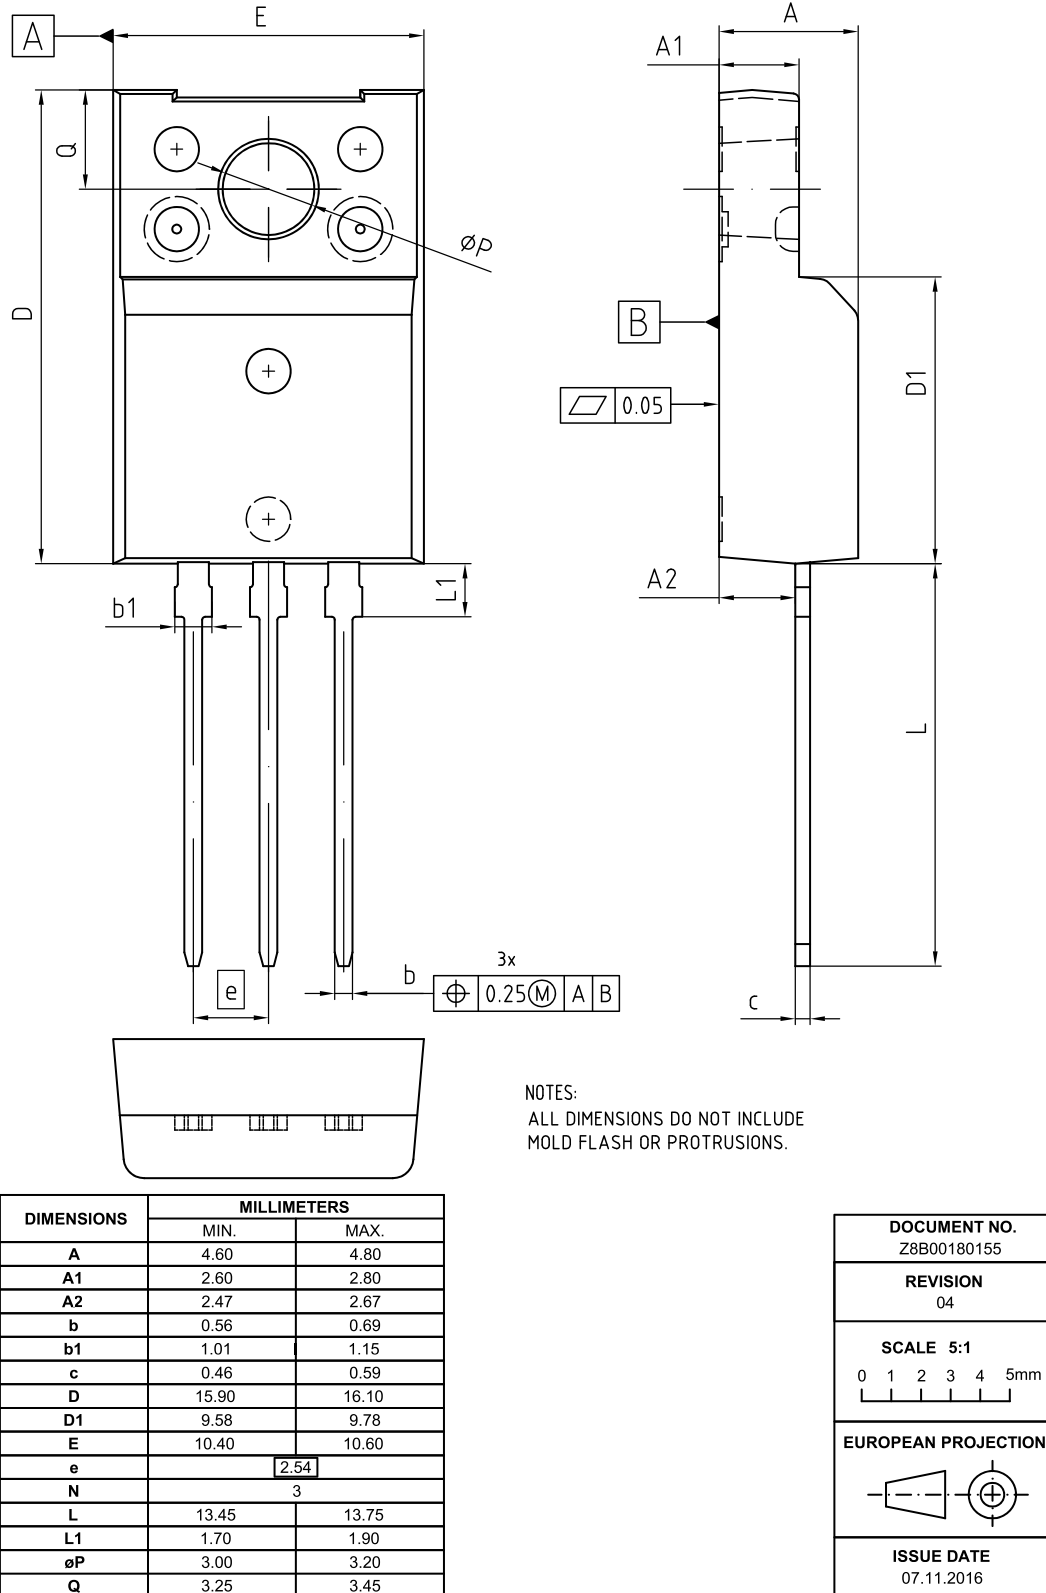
Outline PG-TO 220 FullPAK - Narrow Lead, dimensions in mm/inches
